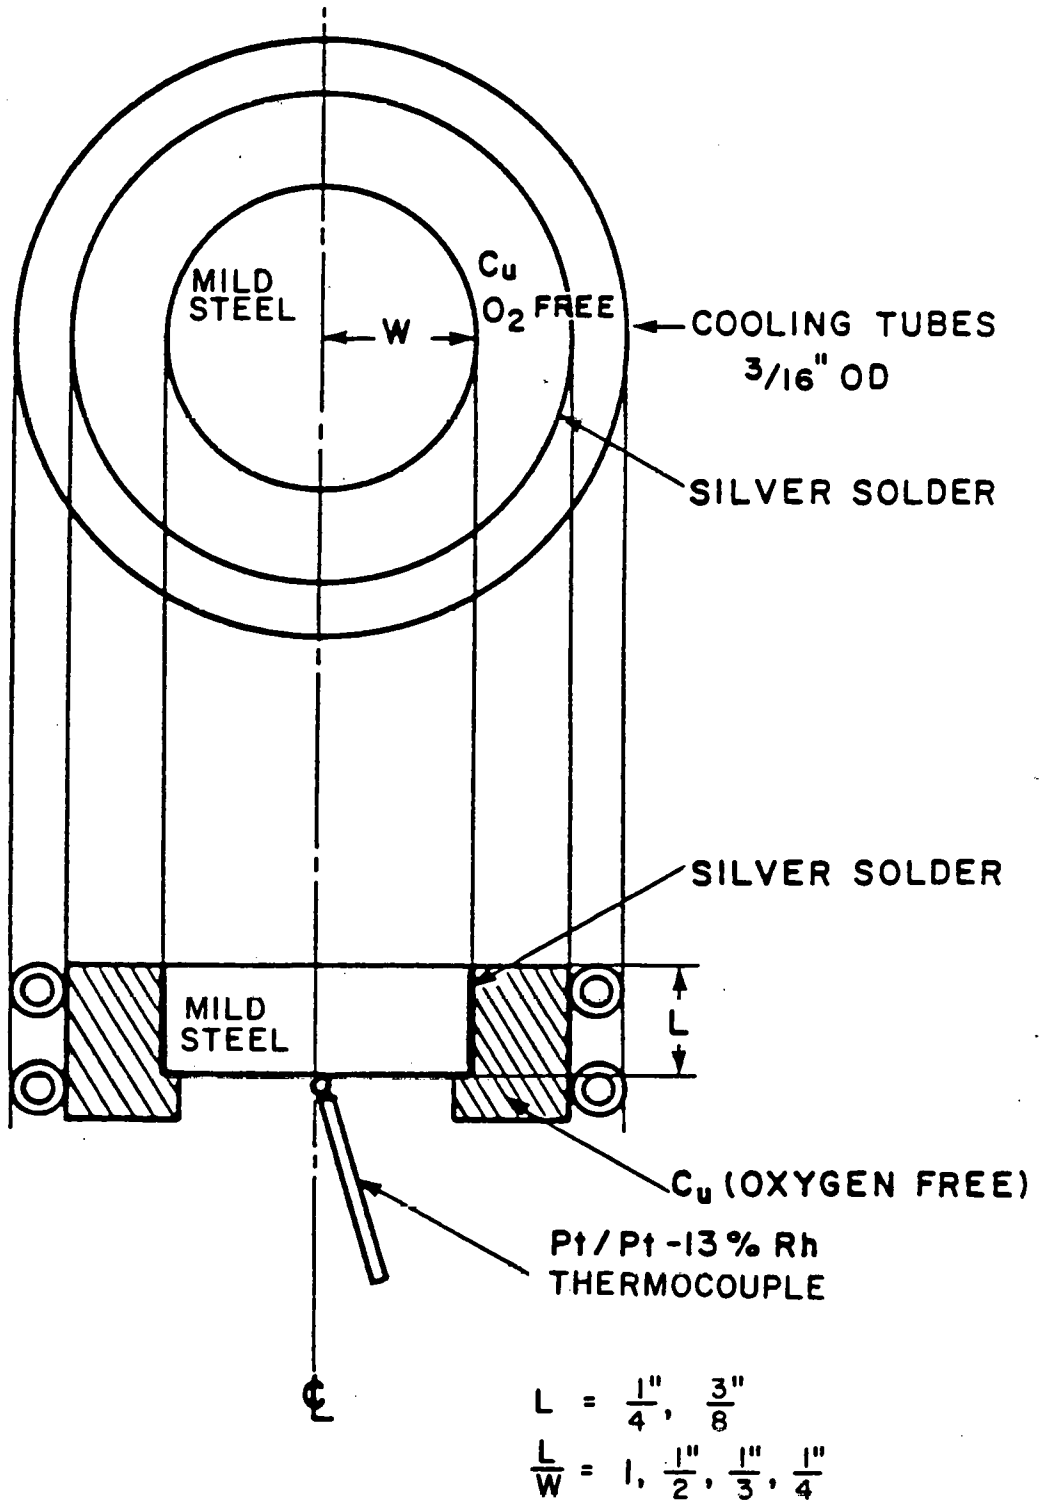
Sketch of Work Piece Holder and Cooling Piece.
